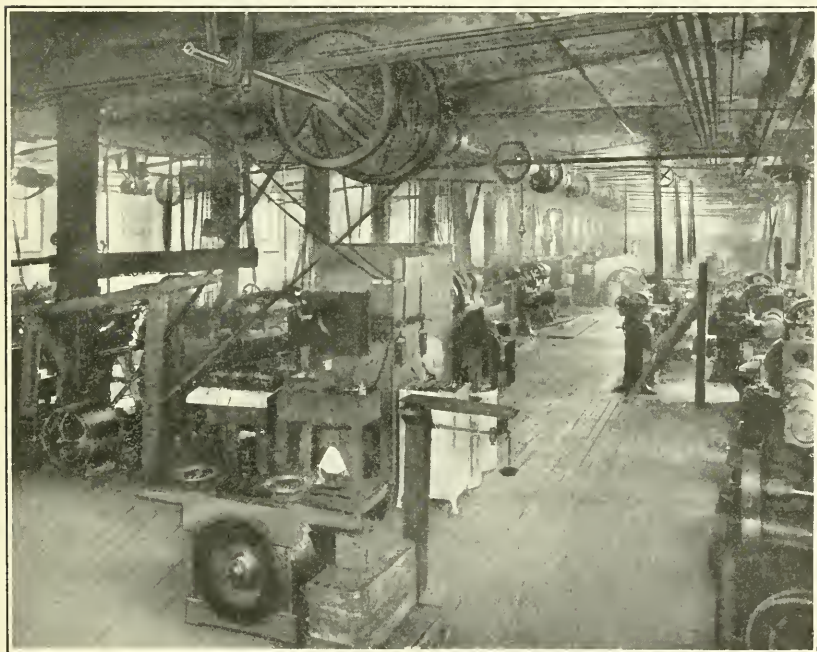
VIEW SHOWING LINE SHAFTING TESTED
